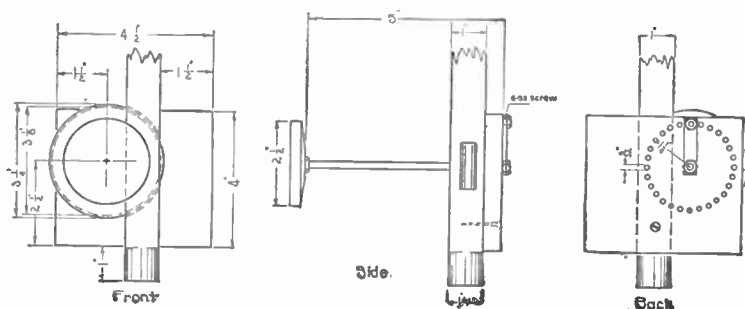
Details of coupling control, showing section cut from upright post, and method of holding secondary in place
